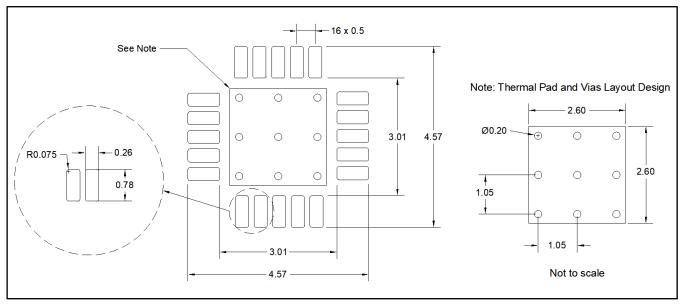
QFN 20L 4.0mm × 4.0mm package soldering footprint (NOT TO SCALE)
